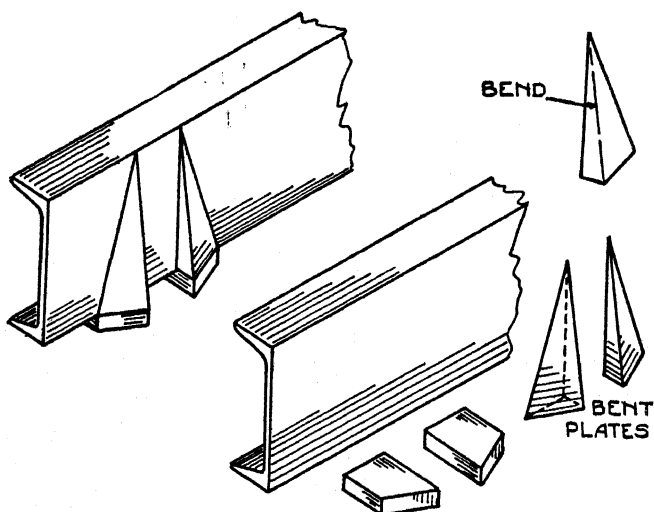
A suggestion for improving appearance of a base detail. This low-cost refinement is obtained by cutting and bending bars and plates as shown and welding them to the web of the main channel member.
